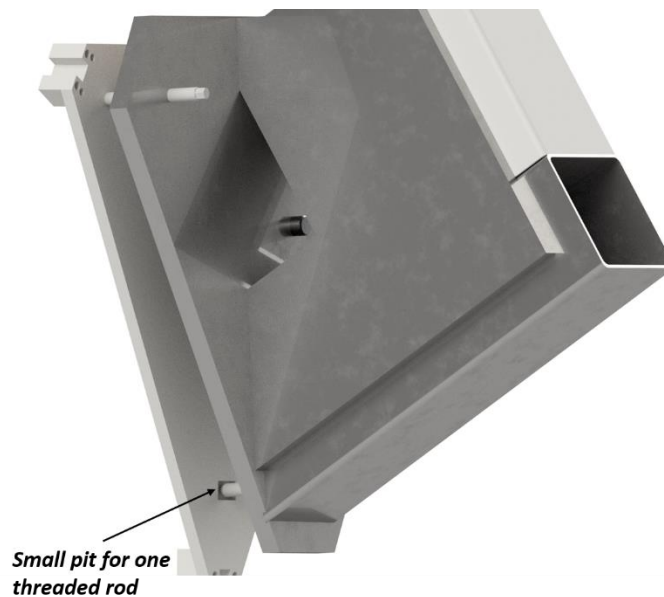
one of the threaded rods allowing tip-tilting of the handling movable part is inserted into a small pit in the movable part, to prevent its rotation around the mirror optical axis.
